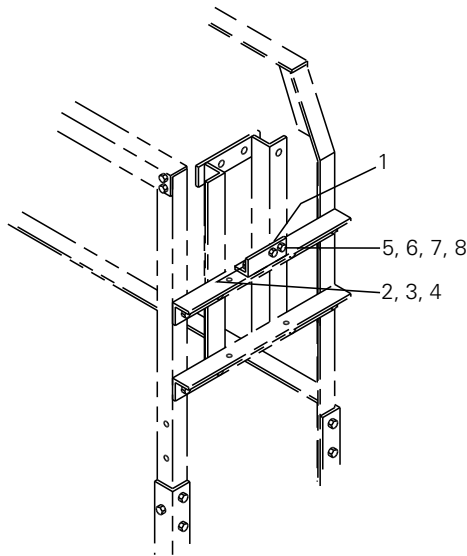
Installing a ground-trip shorting switch (KA89WV6).
